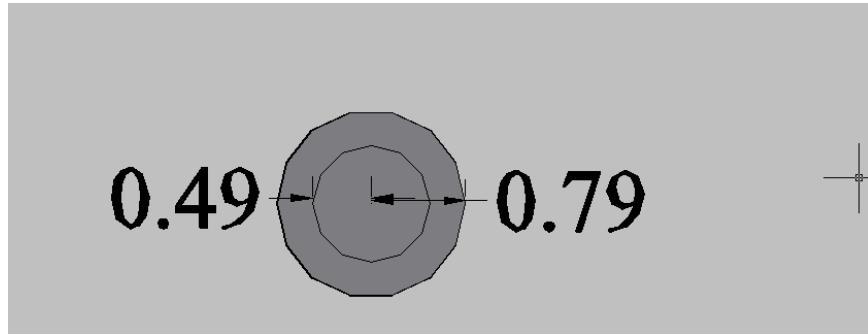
Side View of Shaft (all dimensions are in inches)
